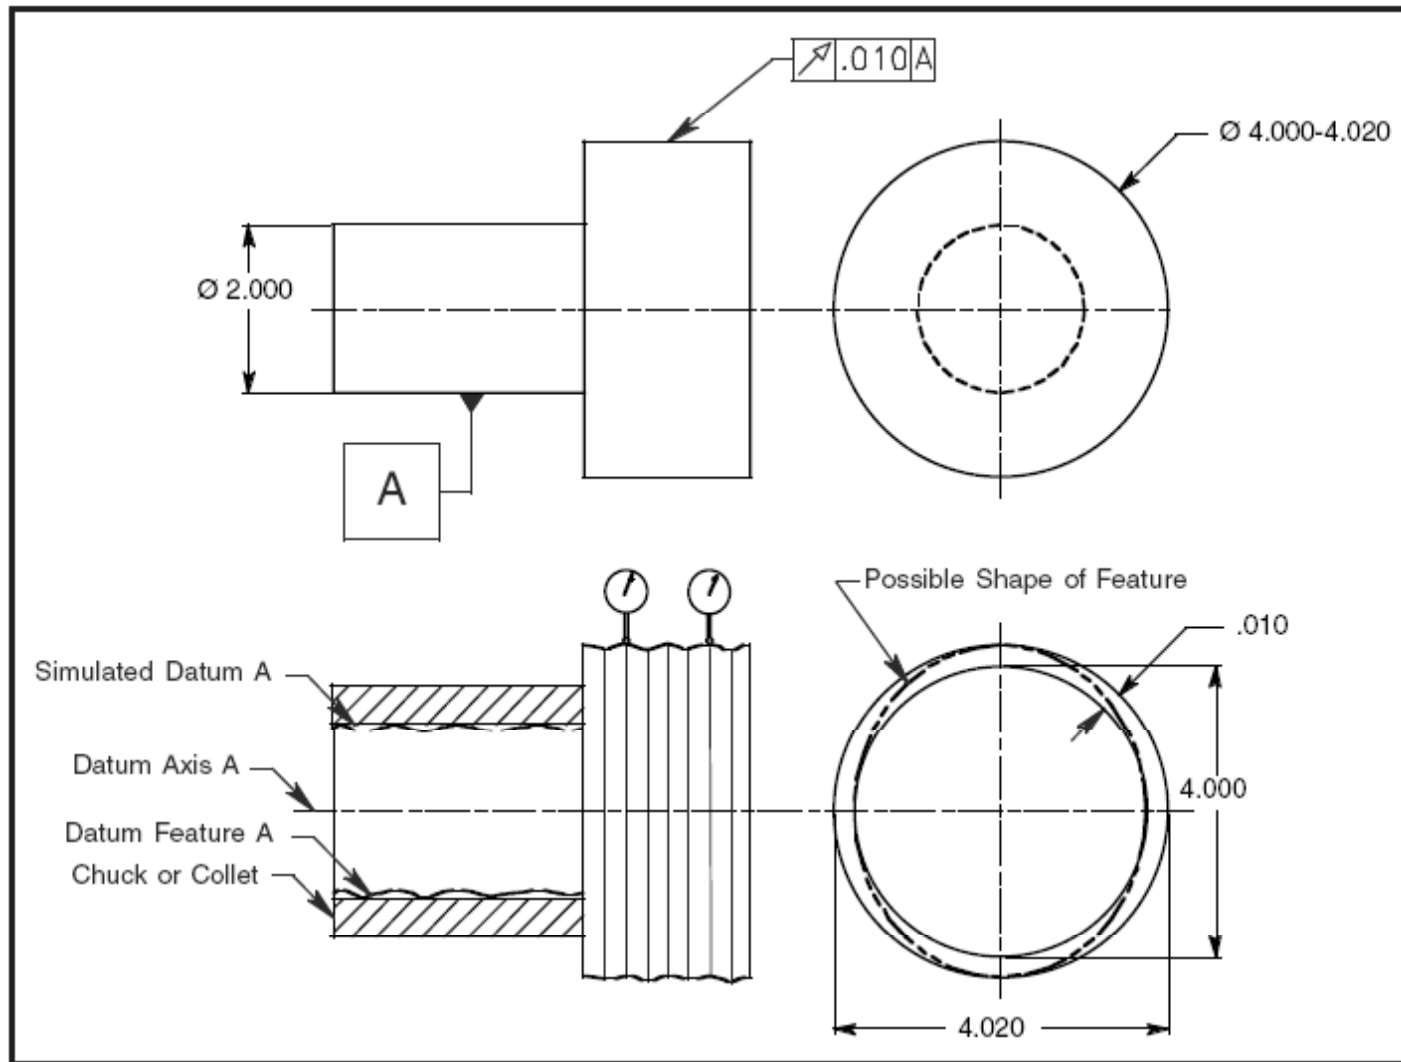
Inspecting circular runout relative to a datum axis.
